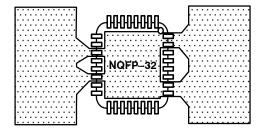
Example of NQFP-32 PCB Ground Plane Layout (preferred layout at top and bottom)
